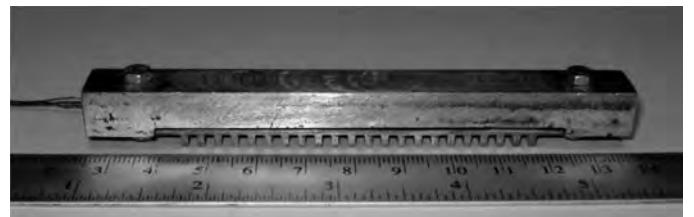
The full assembly of the linear motor with the fixed support and pre-load.
